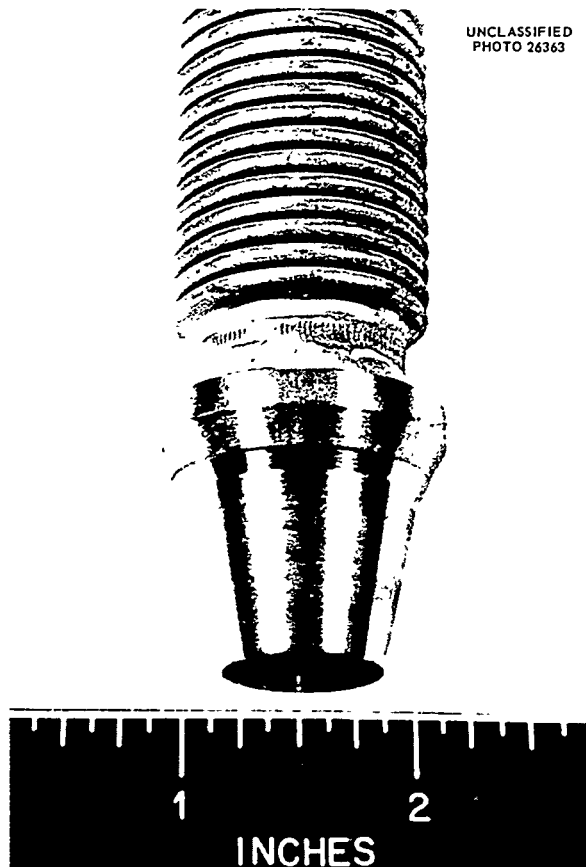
Blanket Dump-Valve Plug After Test.
